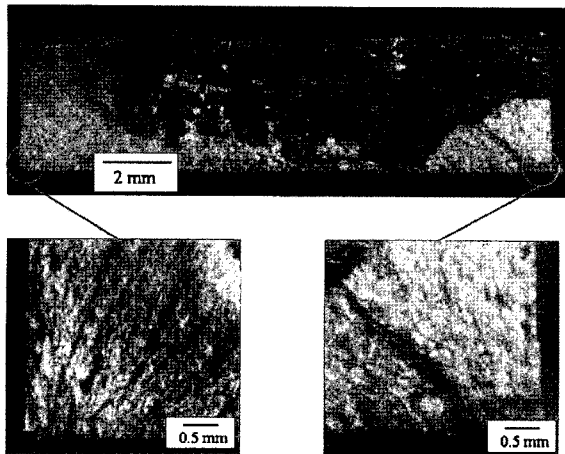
Fractured surfaces showing the fatigue crack initiation site
